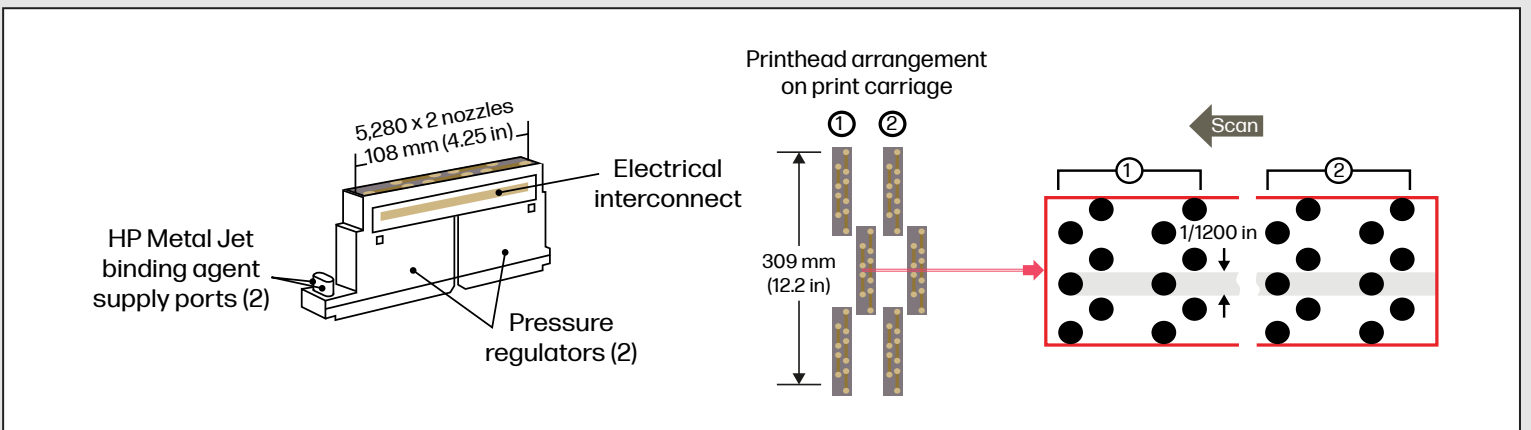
HP Thermal Inkjet printhead for HP Metal Jet printers, printbars, and details of nozzle arrangement.
